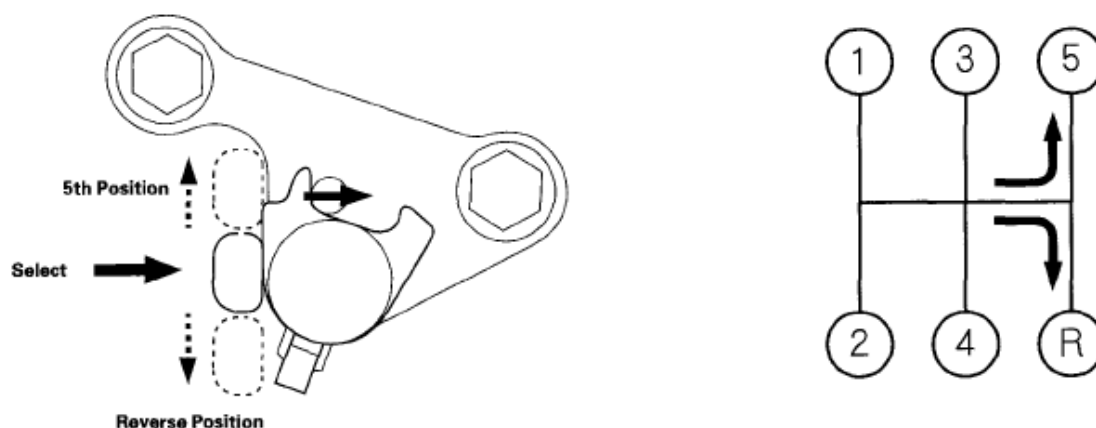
Identifying 5th Gear Or Reverse Gear Position
